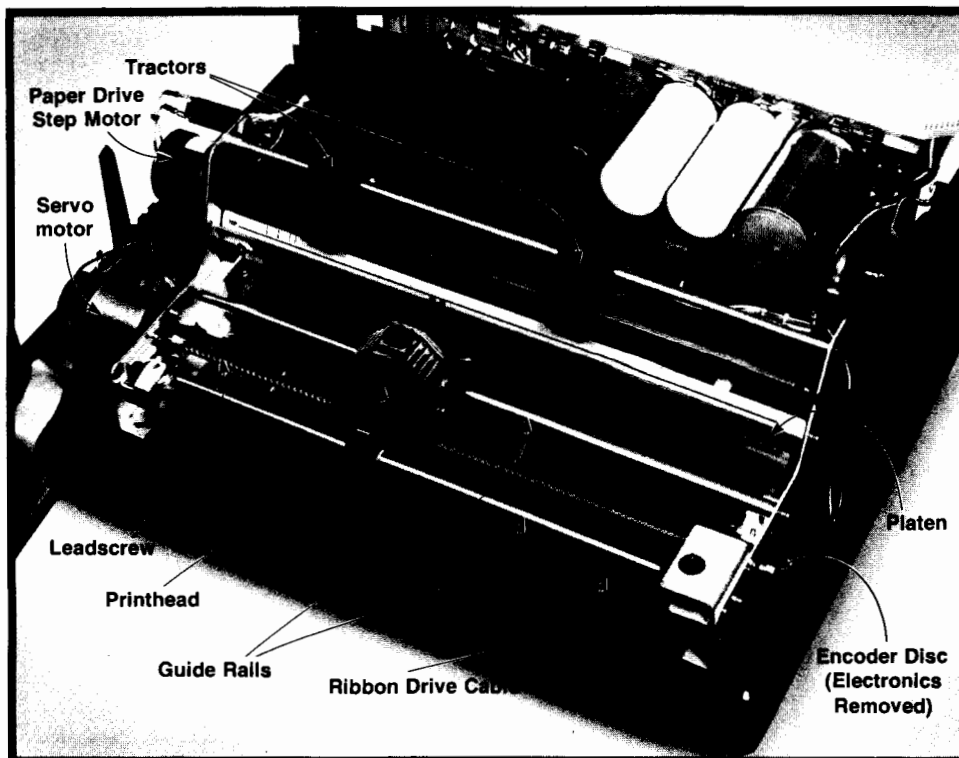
Printing mechanism has few moving parts. The same mechanism is used in both the printers and the printing terminals.
